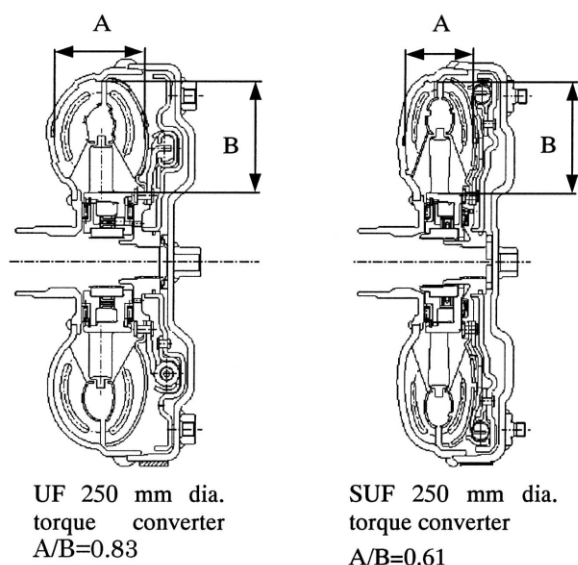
Sectional view of UF torque converter and SUF torque converter
